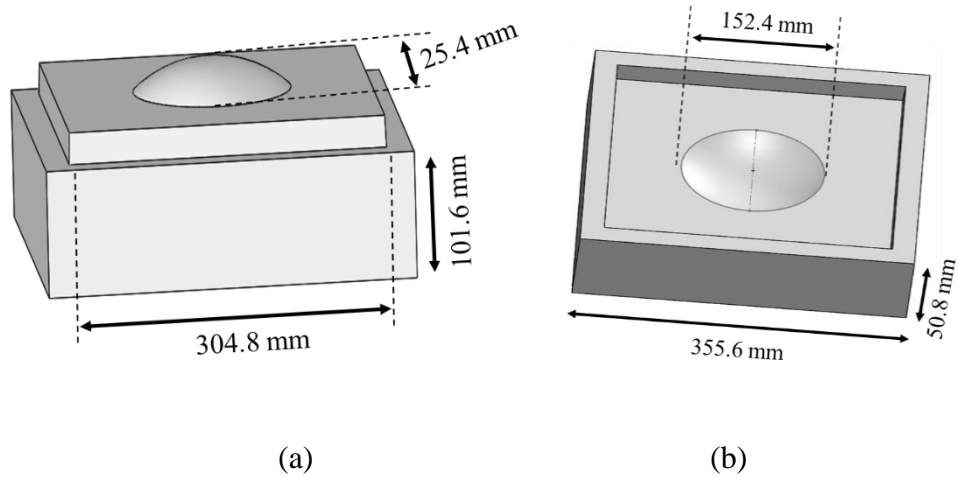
Design of 50CF-PPS printed dome-shaped mold (a) Male mold (b) Female mold. The molds were printed using BAAM with bead width 13.97 mm (0.55"), and bead height: 5.08 mm (0.2")
